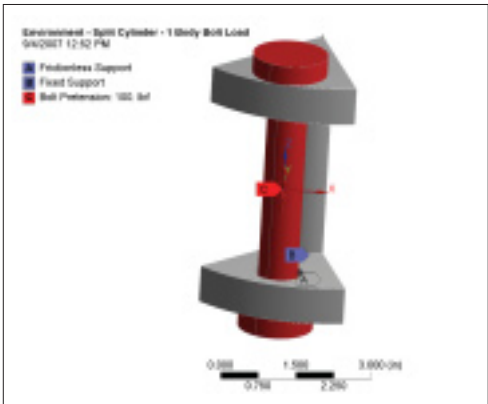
For greater control over preloading conditions, the bolt load can be scoped to a single body.
